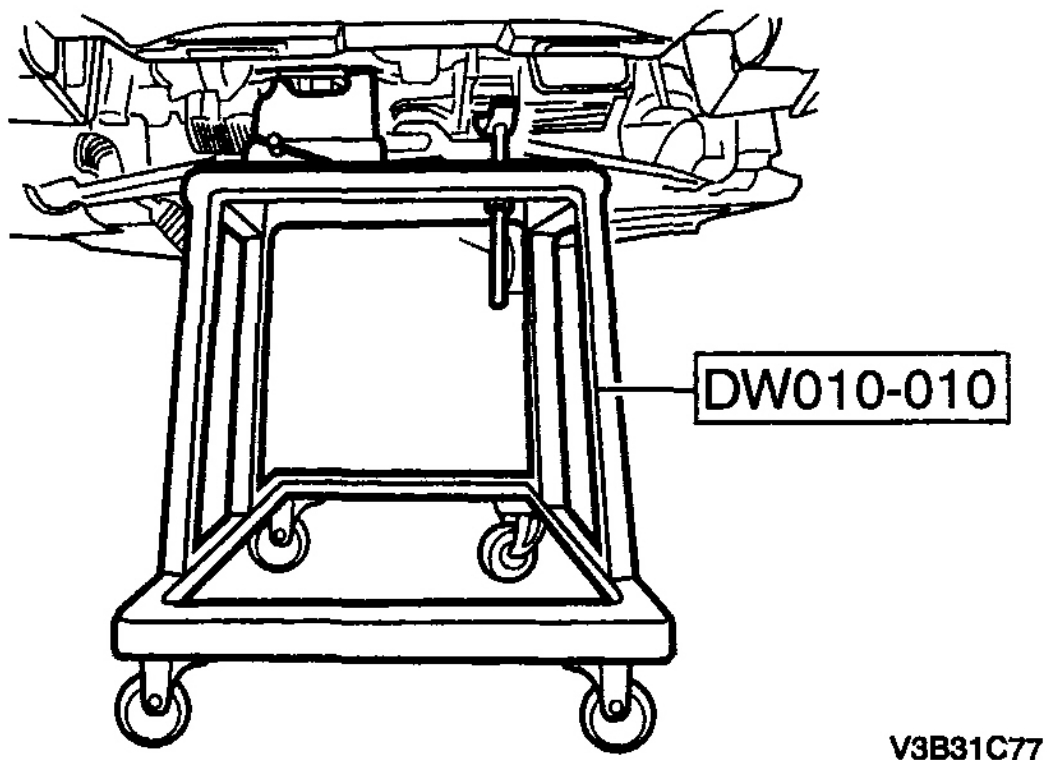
Installing Engine And Transaxle Assembly Using Power Pack Stand DW010-010
